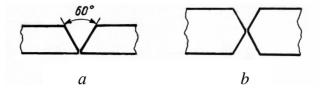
V-shaped (a) and X-shaped (b) welding grooves
